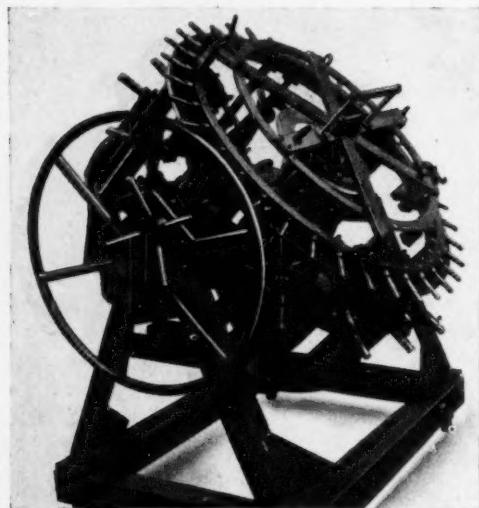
Trunnion-mounted Fixture Made by Belsize Engineering for Checking an Air Intake Casting for a Jet-Propulsion Unit
